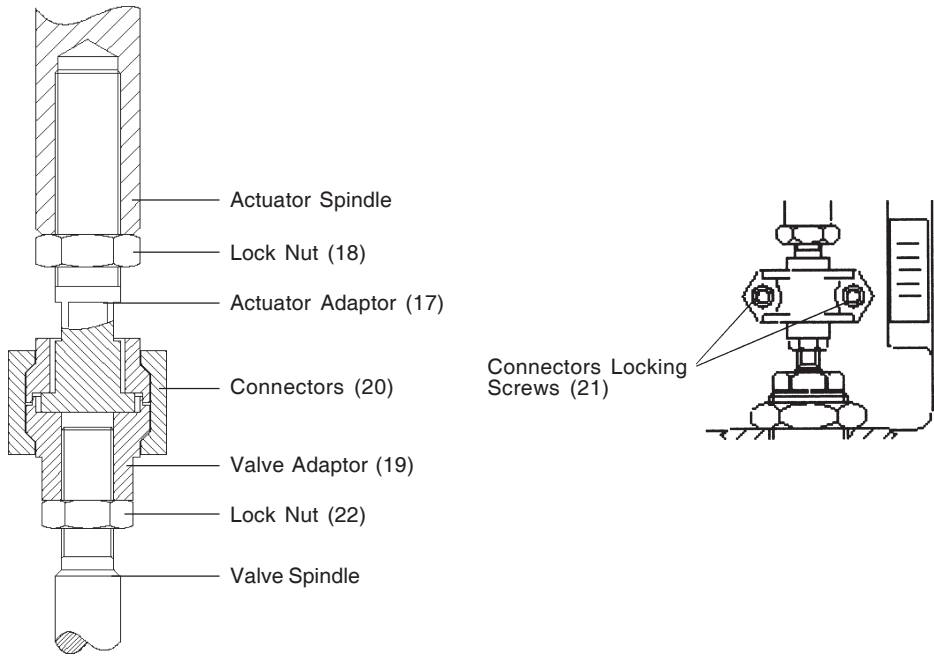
Assembly of Actuator Adaptor, Valve Adaptor and Connectors
